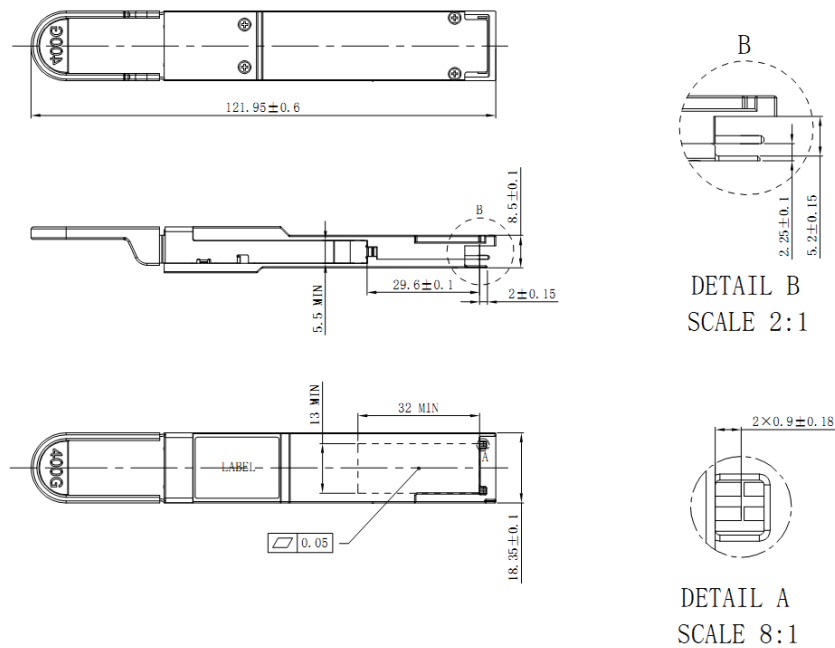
FTCD8618E1PCM-VR Mechanical Dimensions
